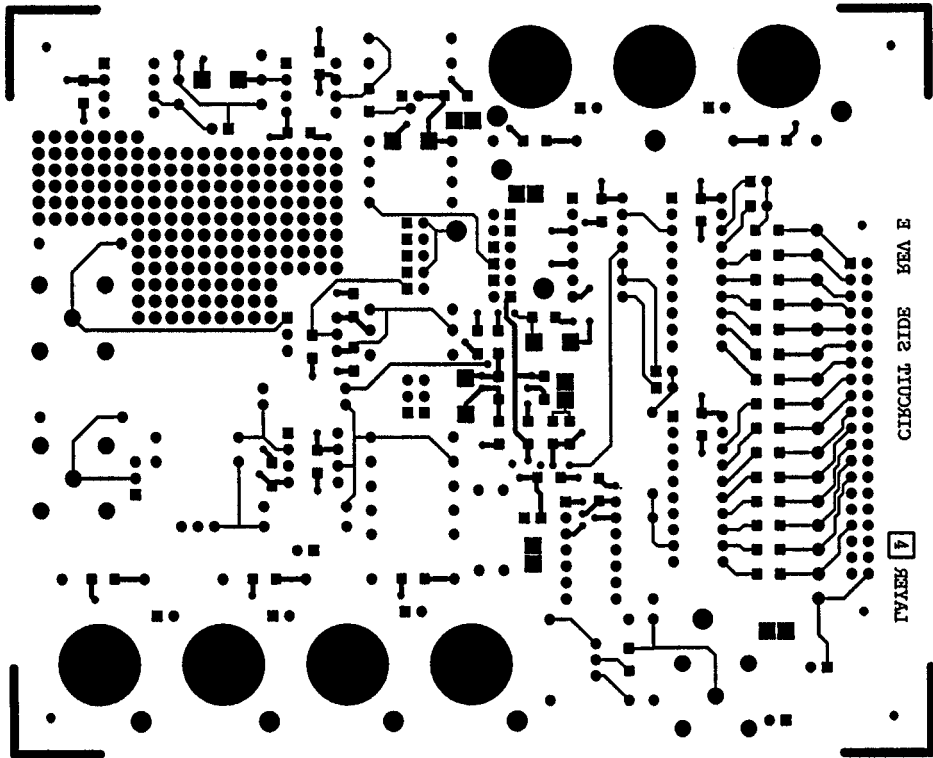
Evaluation Board Solder Side Layout (Not to Scale)
